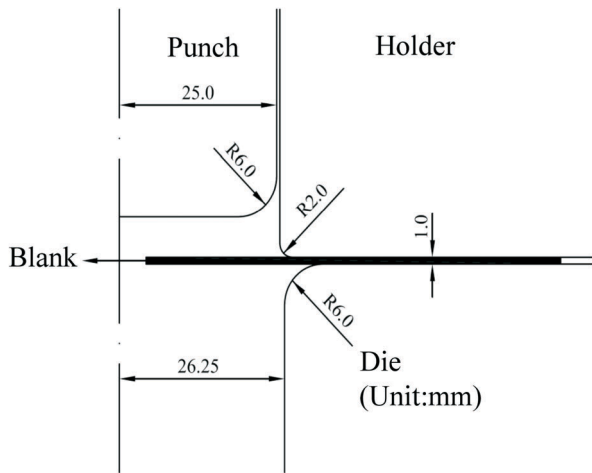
The dimensions of blank and die assembly in the L-bending process.
